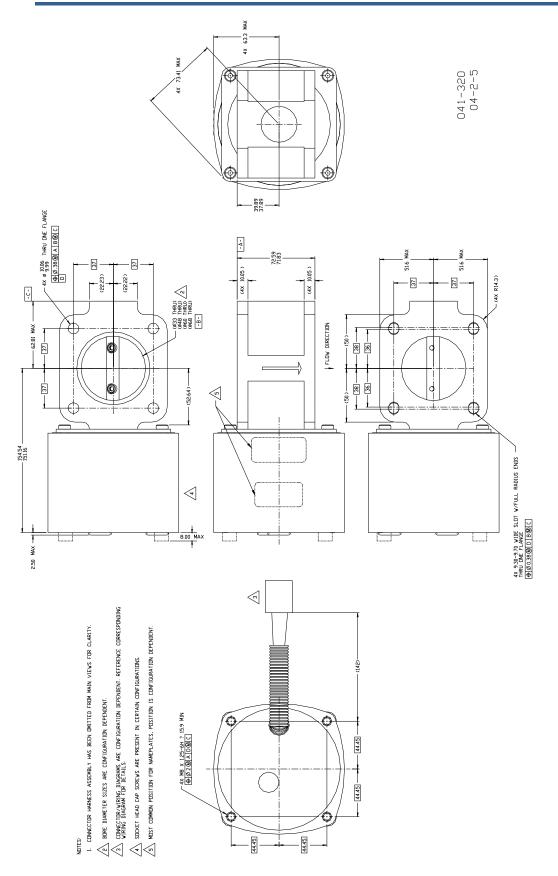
Flo-Tech Outline Drawing (Bottom Slotted Flange Mounting)
